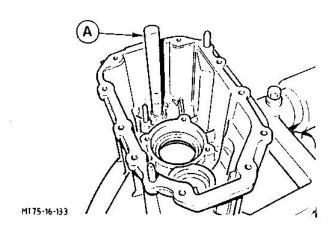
Fit main selector shaft ball sleeve. A - Special Tool 21-044-A
